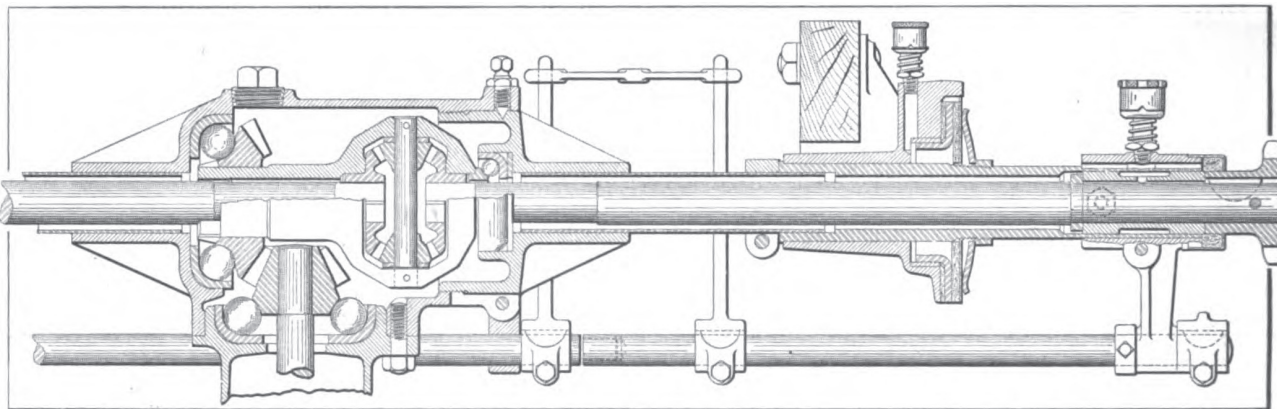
Depleting jackshaft in section with differential and large ball bearings for the bevel drive
